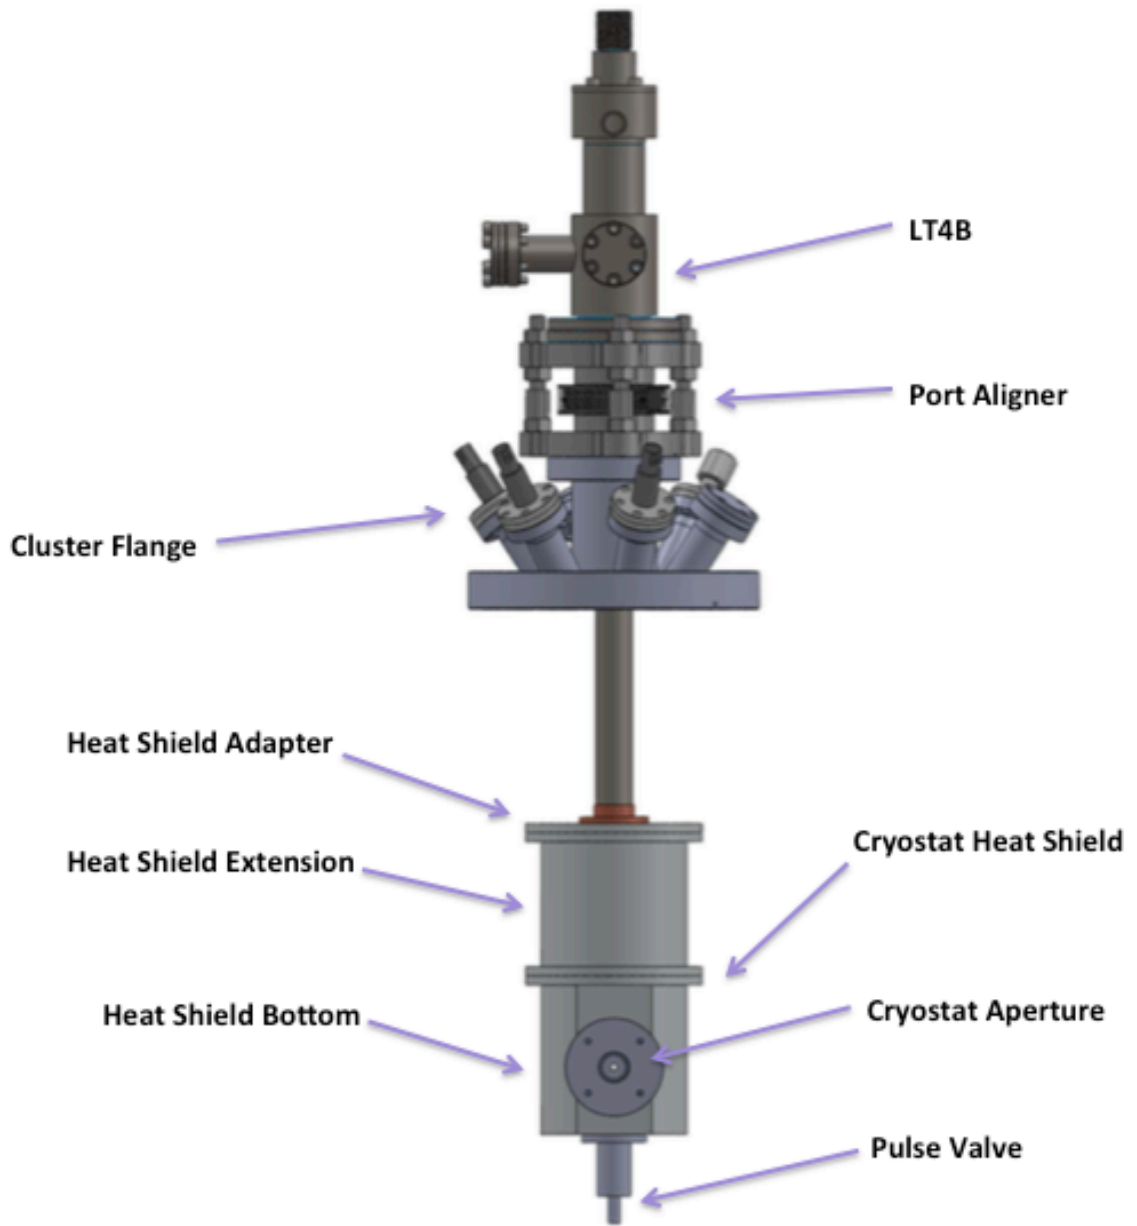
This schematic illustrates the existing pulse valve mount on the bottom of the heat shield assembly.
